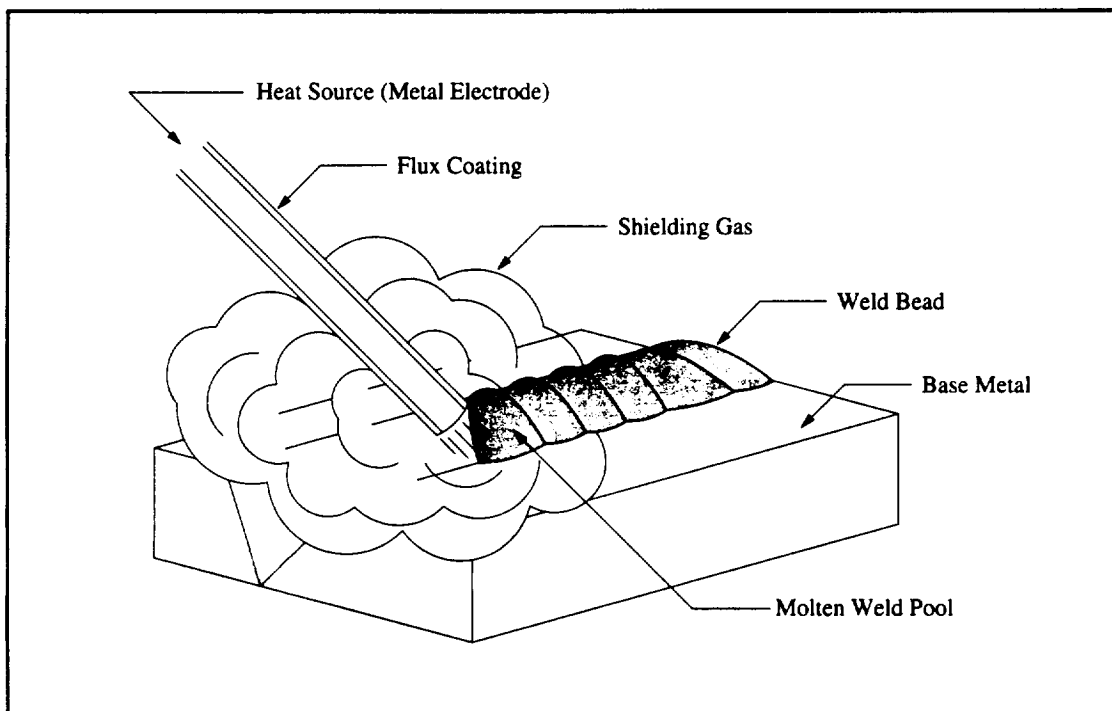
Shielded Metal Arc Welding (SMAW) [10]
